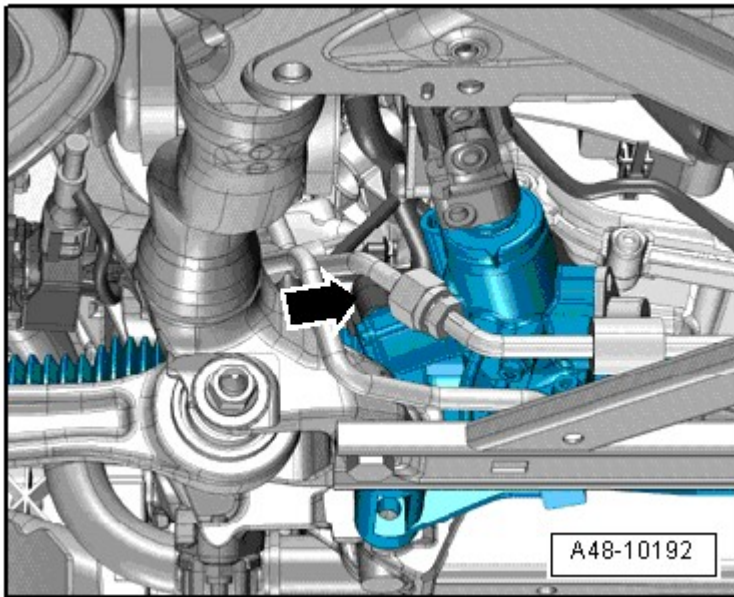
Disconnecting Electrical Connector On Steering Gear
